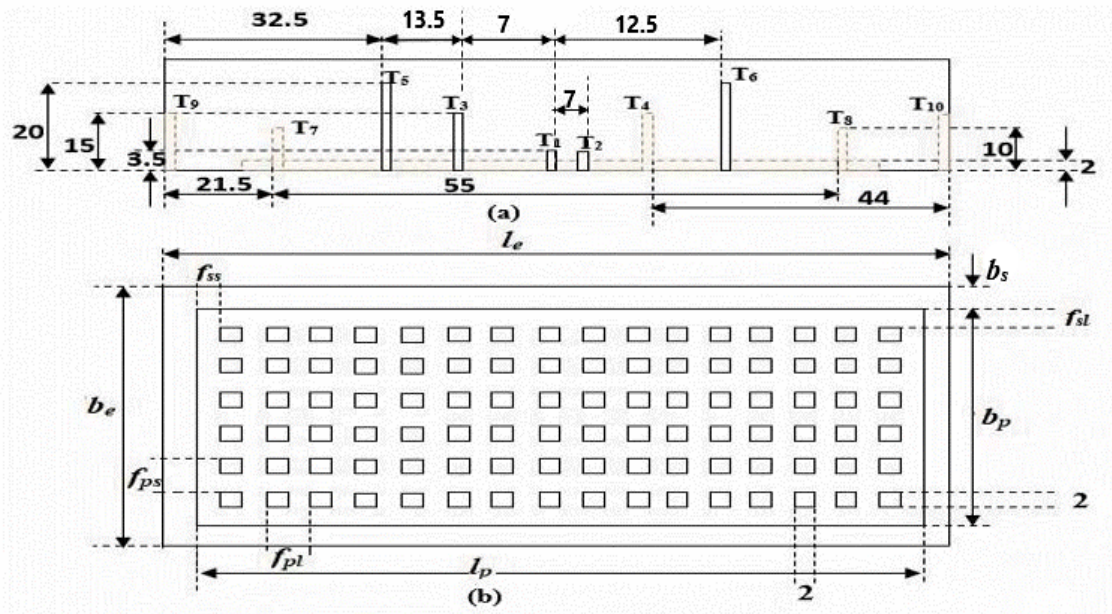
Thermocouple positioning for both the heat sinks with dimensions in mm
